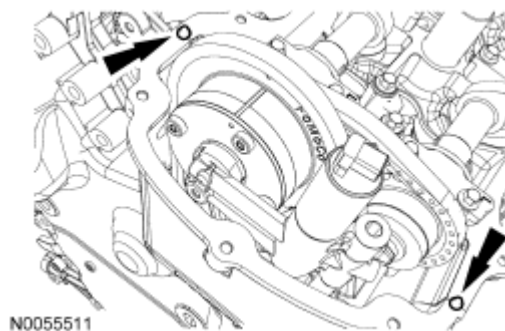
Applying Bead Of Motorcraft High Performance Engine RTV Silicone To Engine Front Cover-To-LH Cylinder Head Joints
